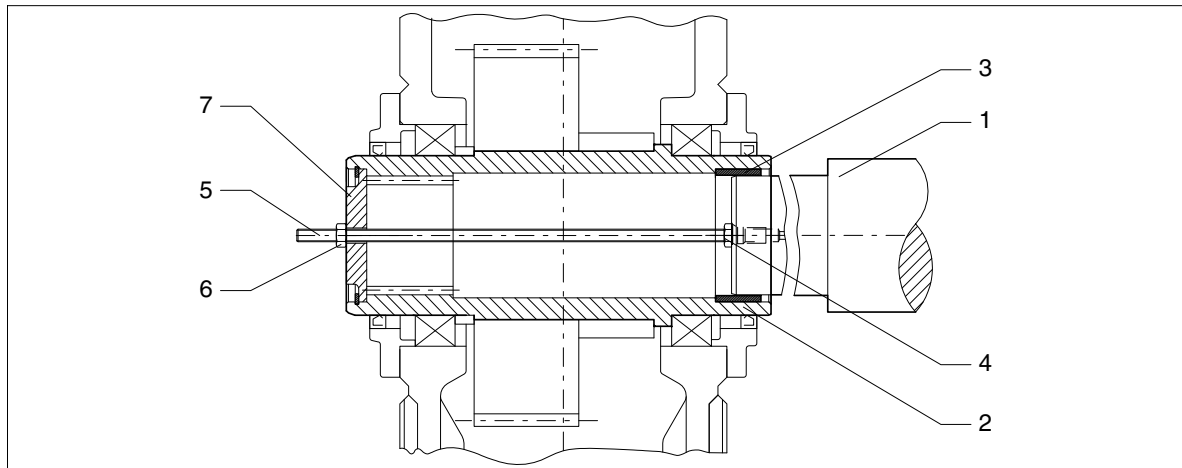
Hollow shaft with internal spline, fitting with DU bush
